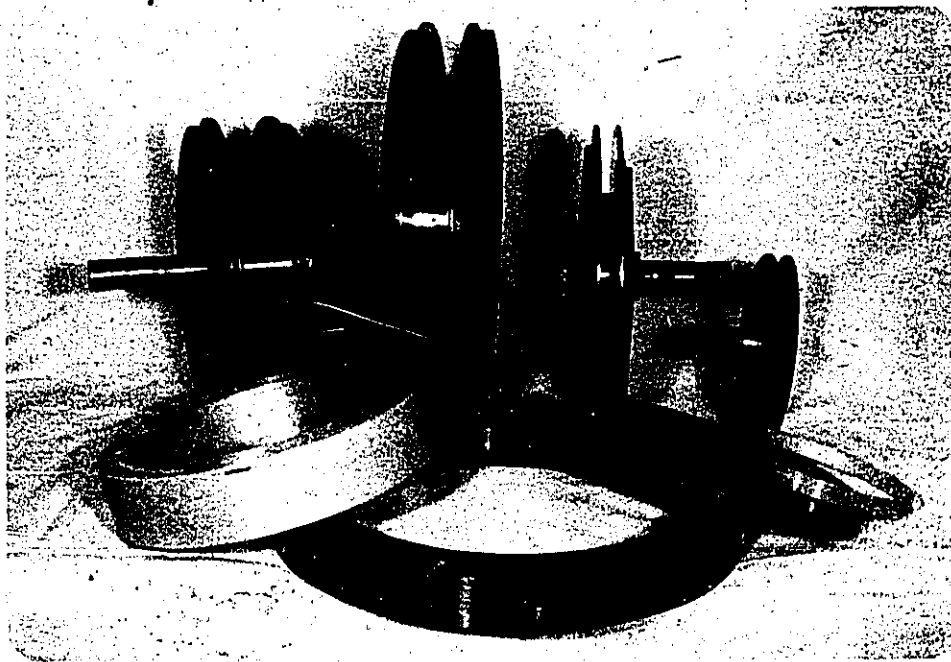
Steel mandrels used in producing the composite rings. A sample ring produced by each mandrel is also shown.
